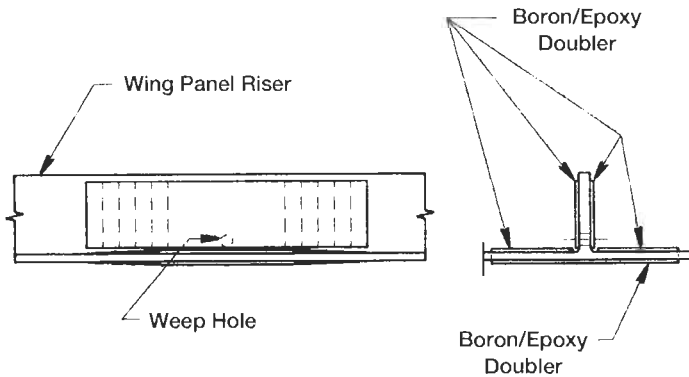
View of C-141 wing panel section showing original planned five doubler repair scheme and eliminated inner doublers.
